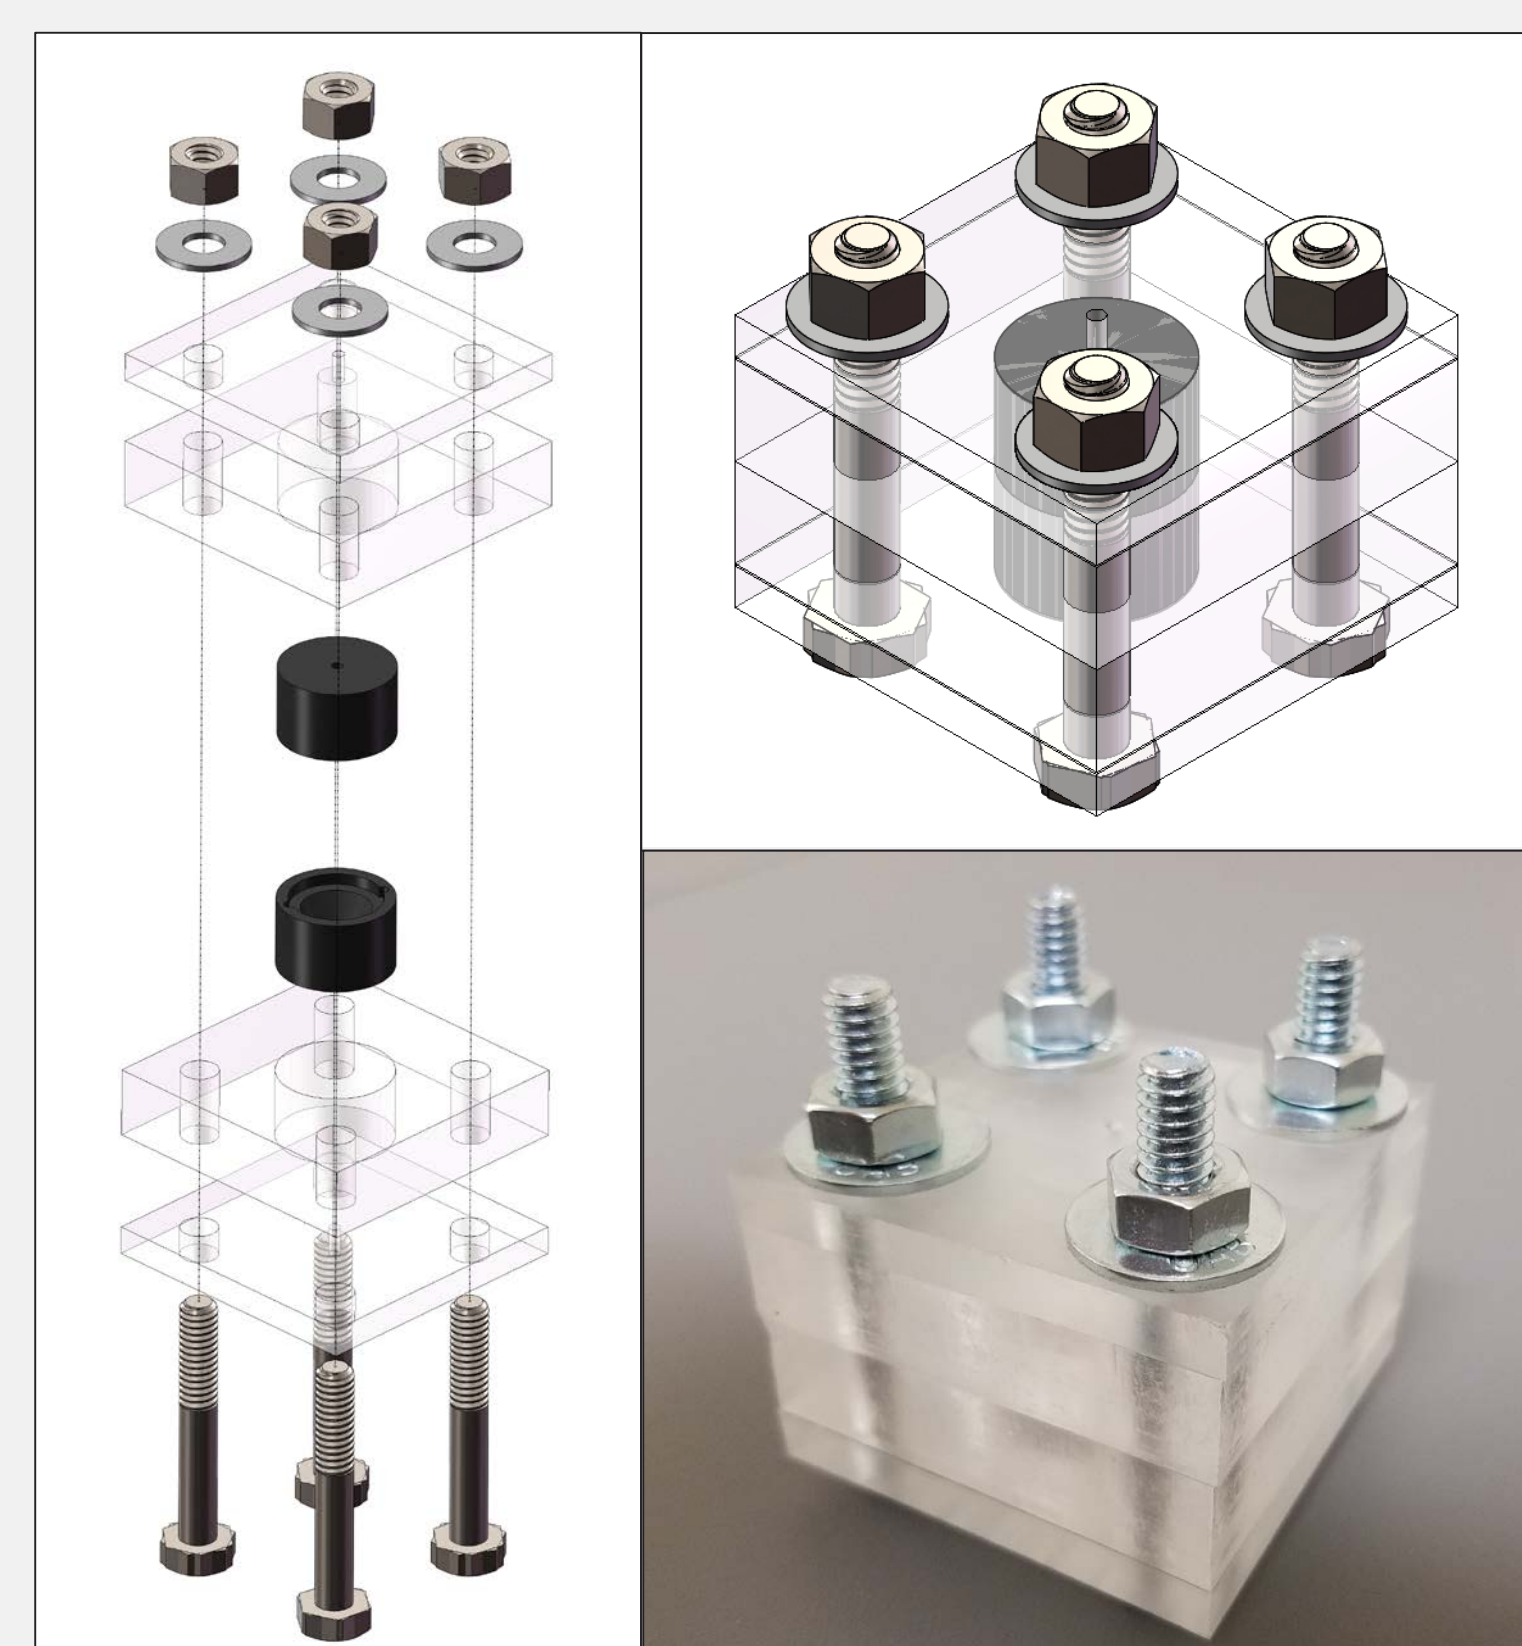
Left: Device and clamping assembly schematic (exploded view). Top Right: Device and clamping assembly schematic (assembled). Bottom Right: Fabricated device and clamping assembly.
